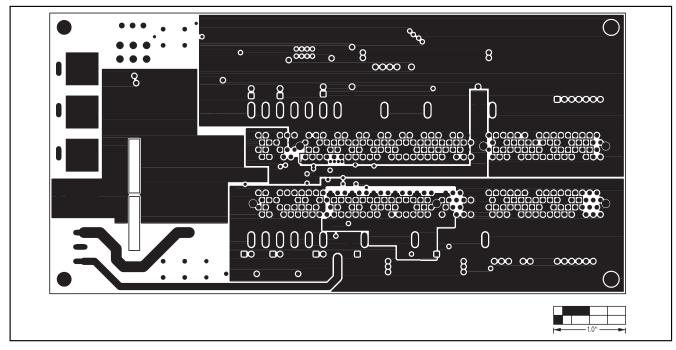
MAX5915 EV Kit PC Board Layout—Inner Layer, Power Plane
